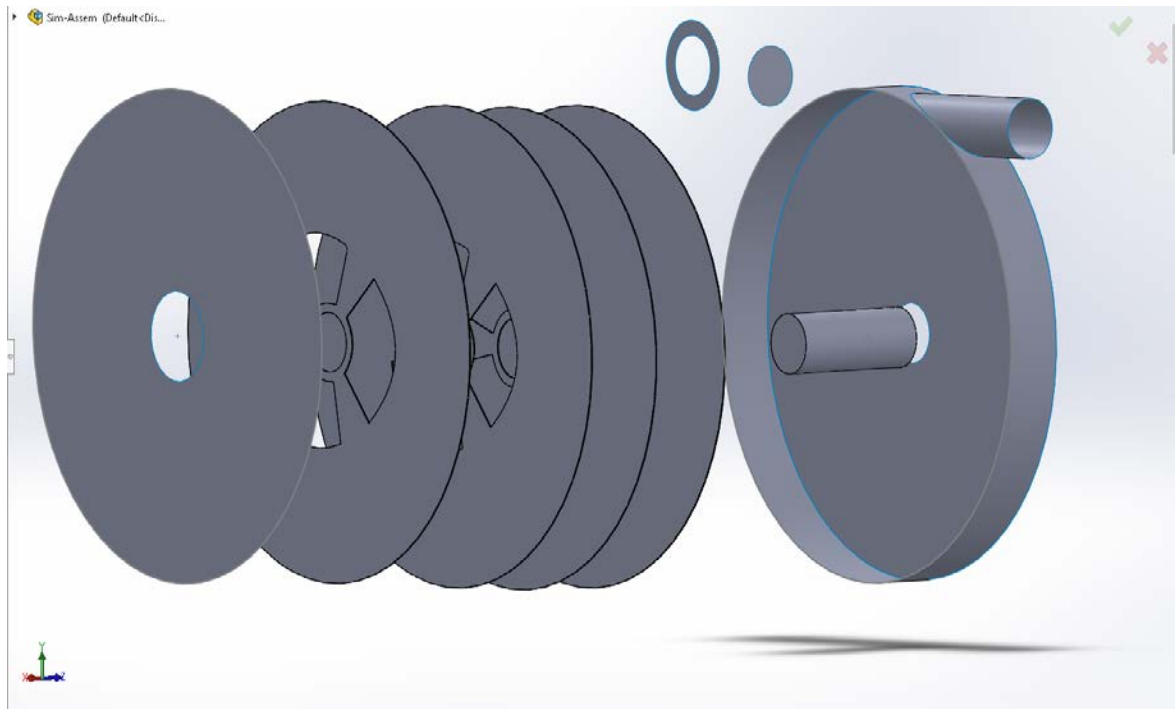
Exploded view of Tesla Turbine with 4 disks and one inlet nozzle
